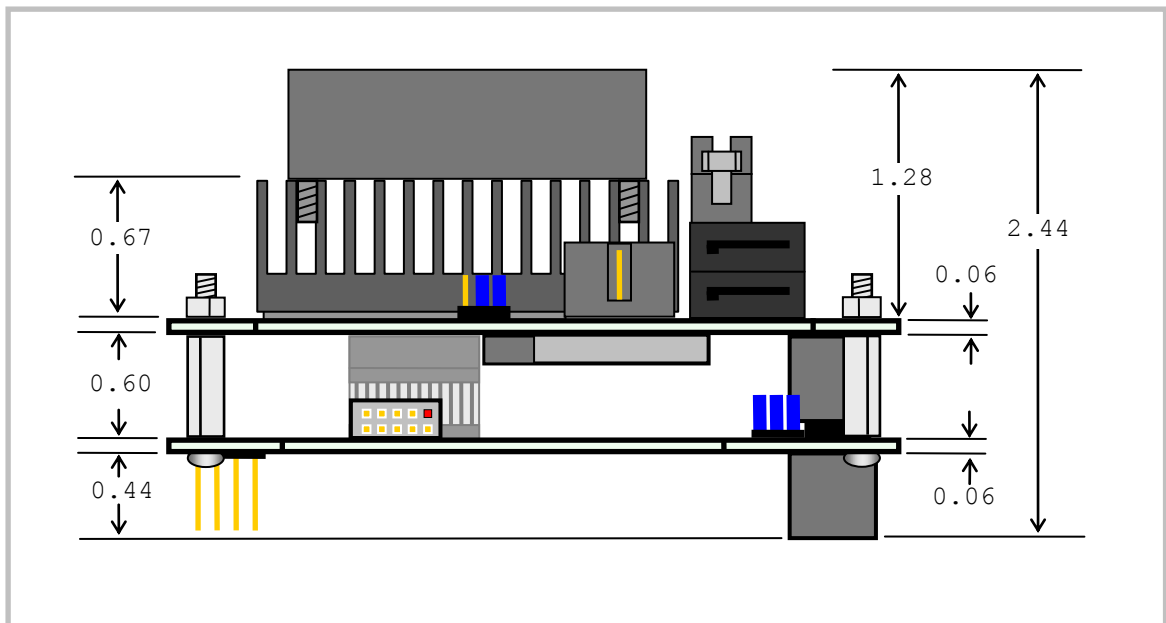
VL-EPM-35 Height Dimensions (Side View)
